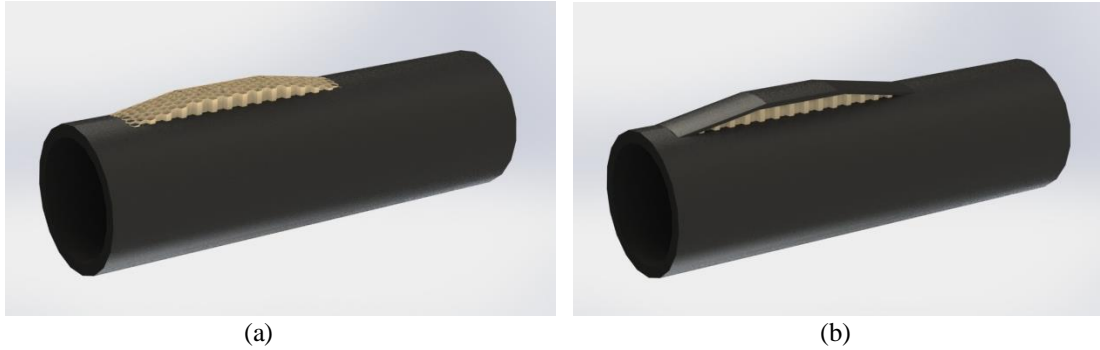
Scaffolding, in the form of cellular structures, can be printed onto a fiber reinforced facesheet as shown in (a). A top fiber reinforced face sheet can be placed on top of the scaffolding to create structures with out fo plane features as shown in (b).
